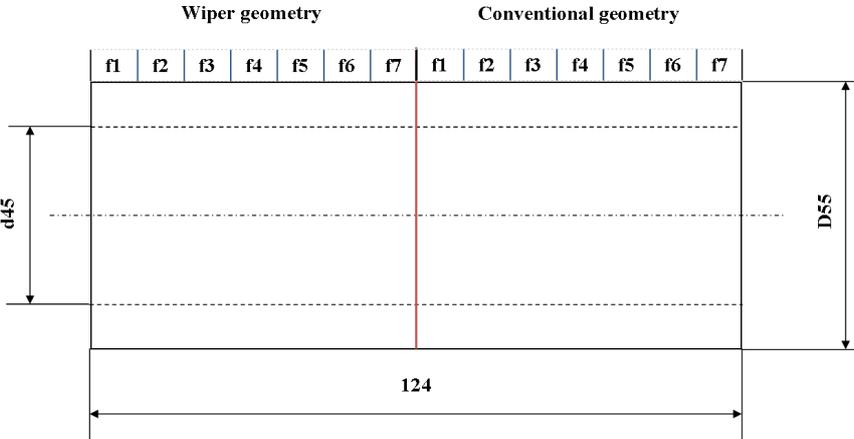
Workpiece and experimental plan, *d* – internal diameter, *D* – external diameter
